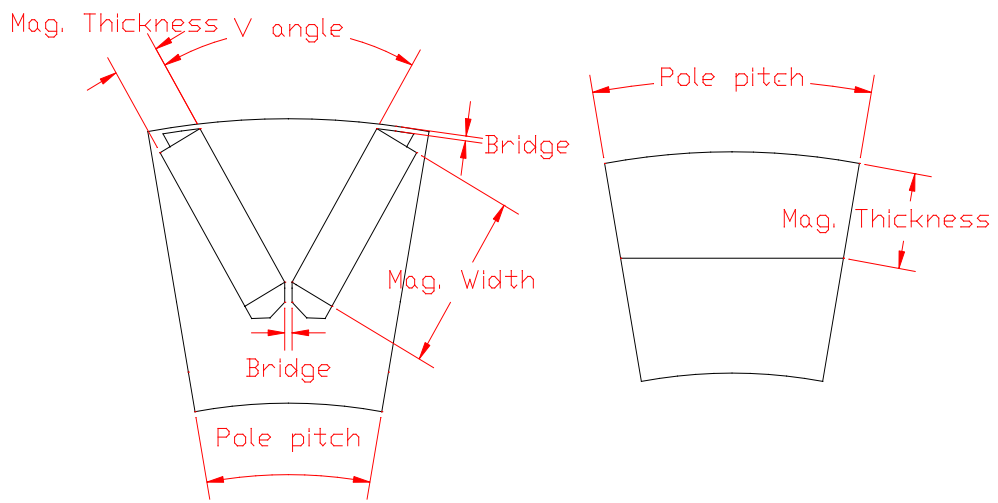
Definition of geometric parameters of embedded and breadloaf surface mounted magnet rotors
